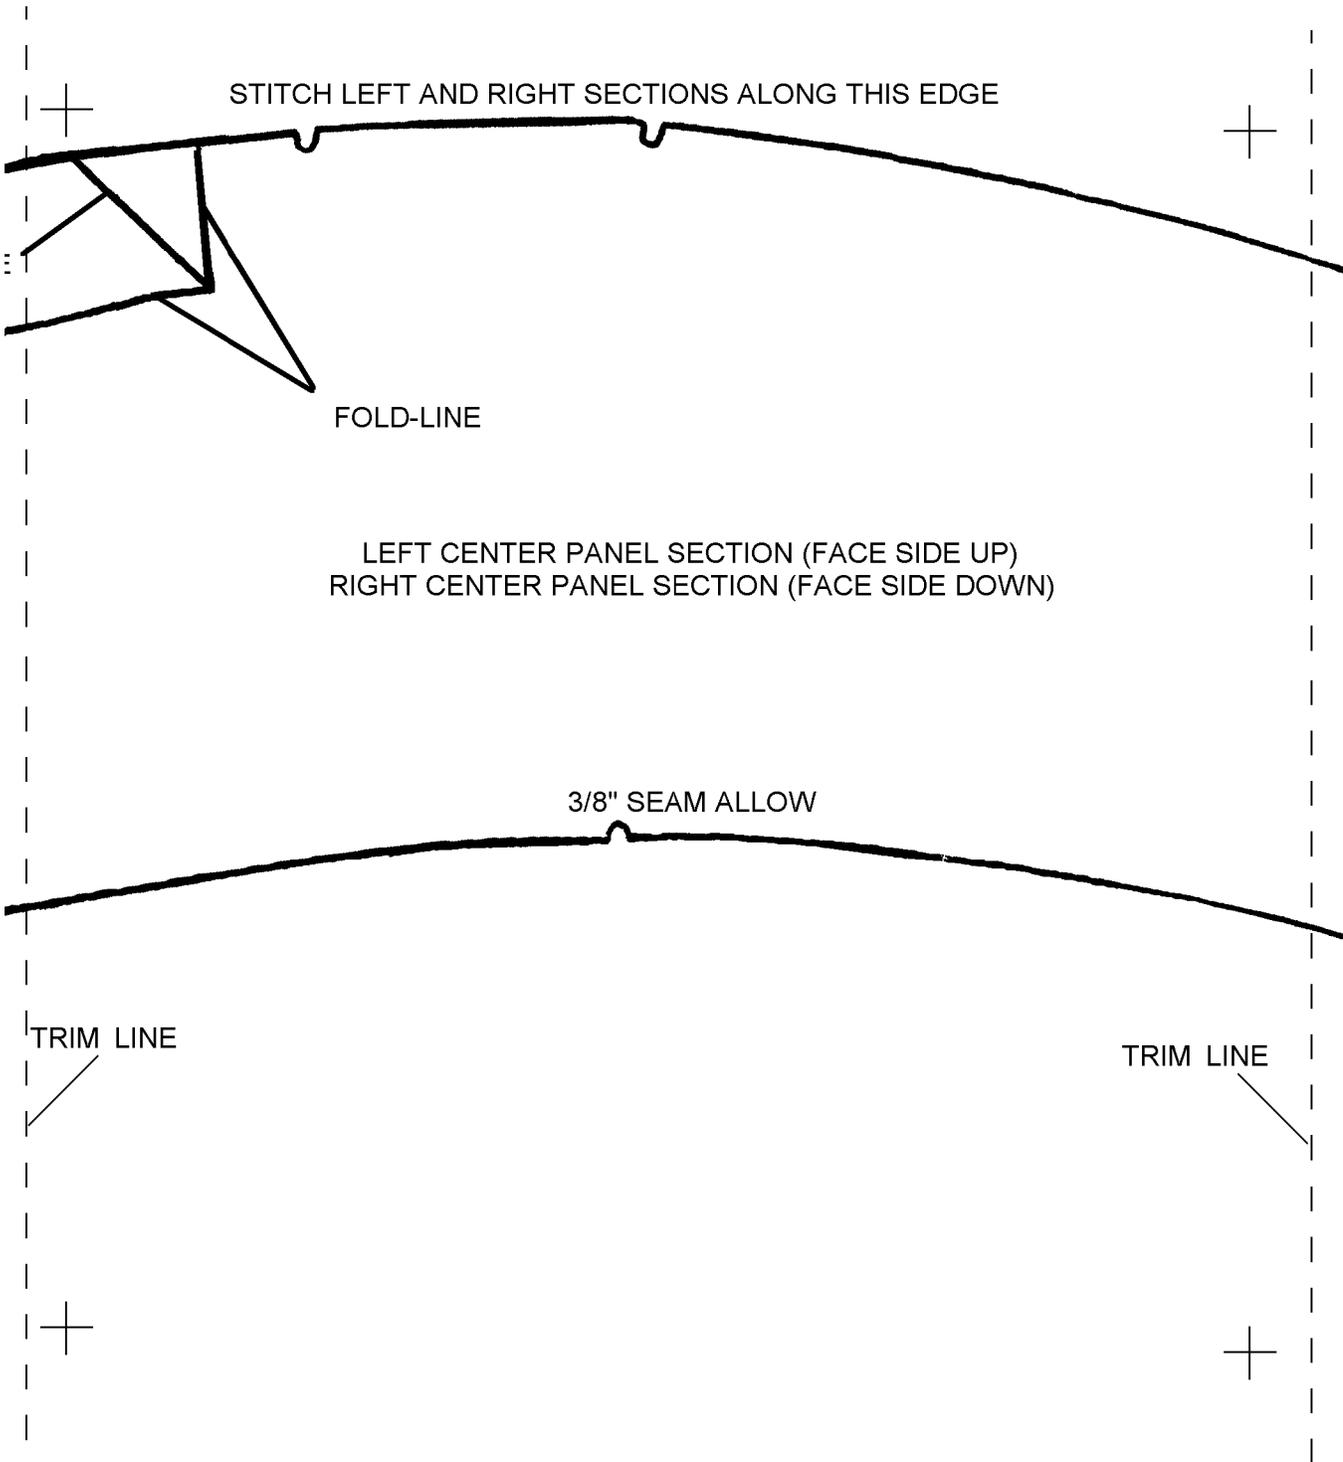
Removable Camouflage Helmet Cover (Extra-Large Wide) (2 of 5)
